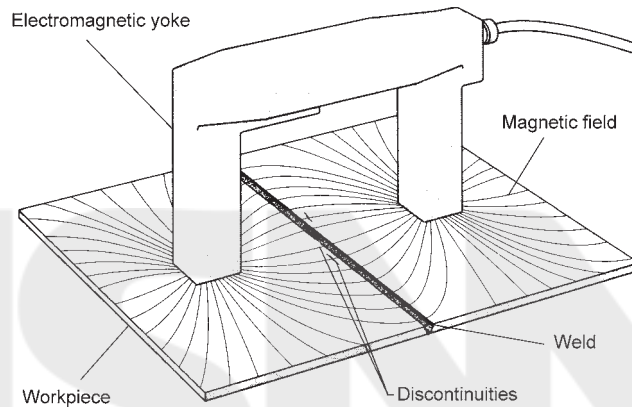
Electromagnetic yoke, showing position and magnetic field to detect discontinuities parallel to a weld bead. Discontinuities across a weld bead can be detected by placing the contact surfaces of the yoke next to and on either side of the bead (rotating yoke about 90° from position shown here). Source: Ref 2
